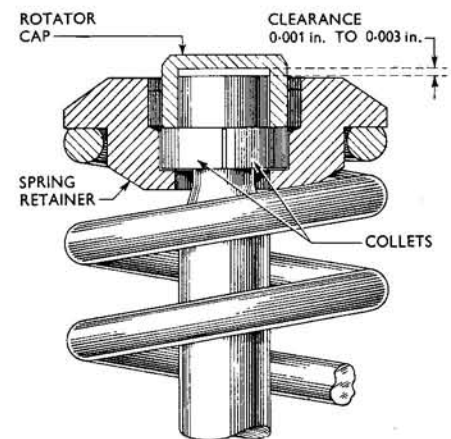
Cross-sectional view of earlier type exhaust valve spring retainer, rotator cap and collets. Clearance between end of stem and inside of rotator cap should be 0.001-0.003.
